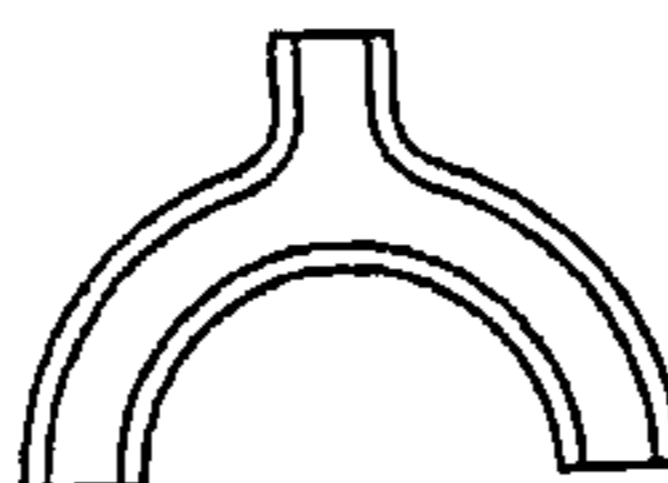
is a front or rear view showing a fifth component piece of the present invention;
